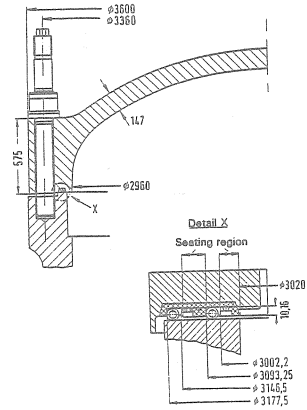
Main dimensions of the flanged connection including the sealing region.
